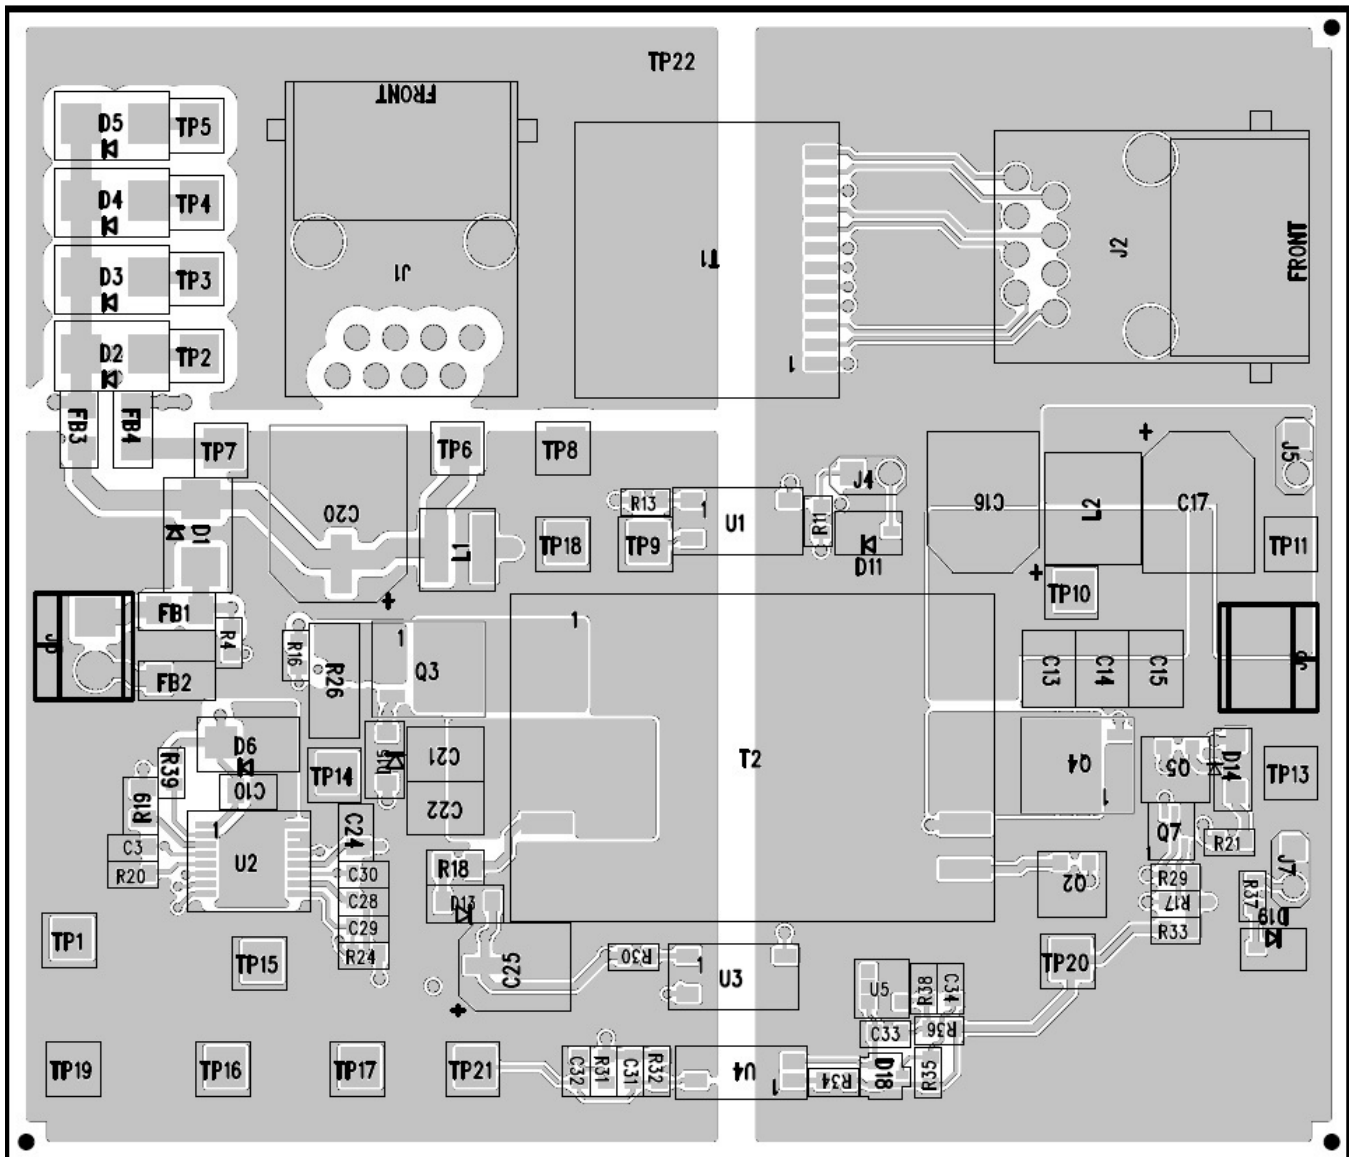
TPS23751EVM-104 EVM Parts Placement and Example Layout
